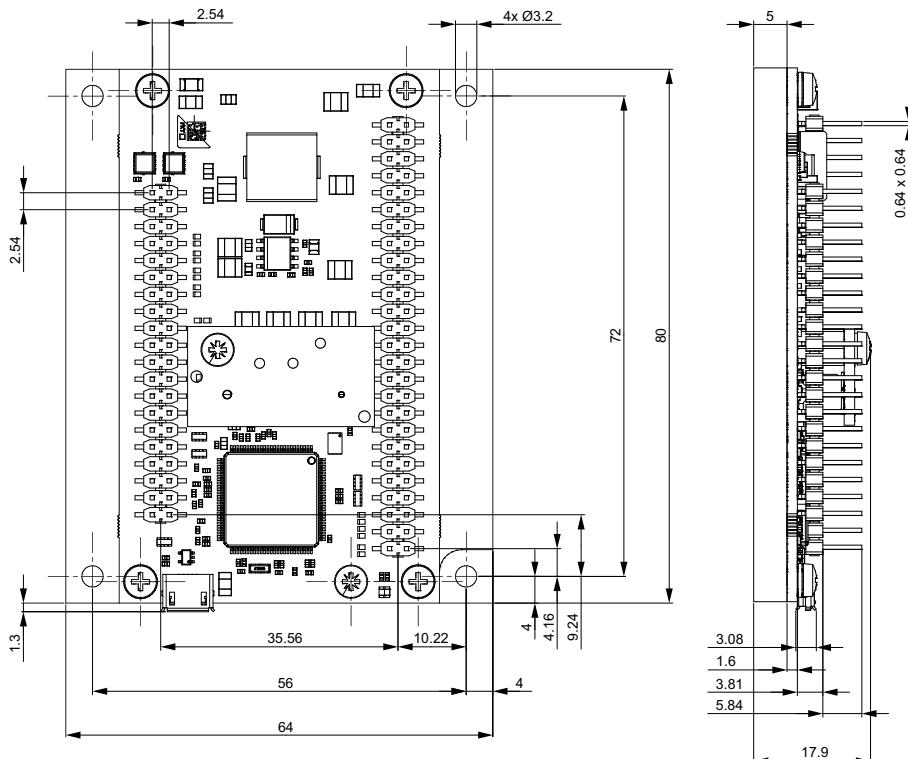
EPOS4 Module 60/20 – Dimensional drawing [mm]
